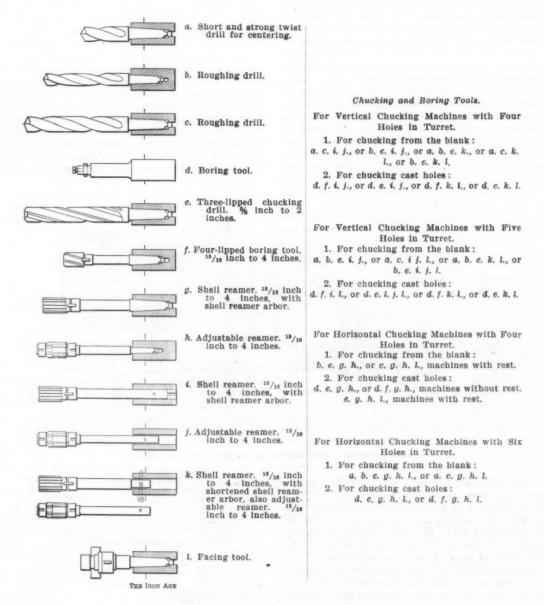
Tools Used in Vertical and Horizontal Chucking Machines.
